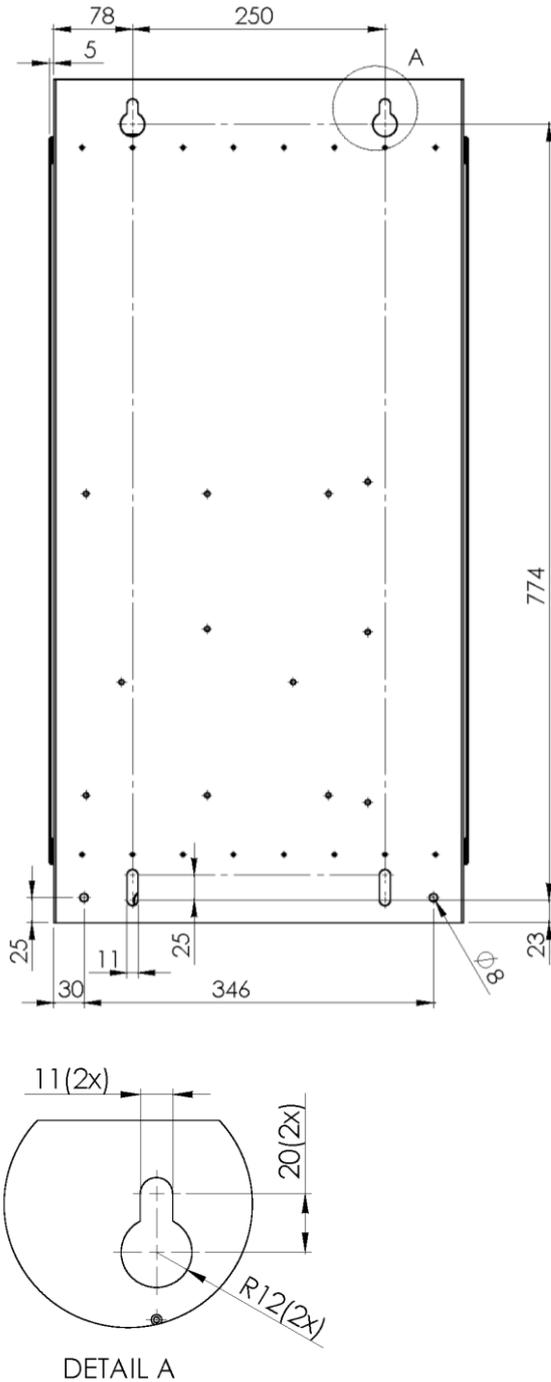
Drilling template ECOsine® active FN3430-030/060-xxx-4
